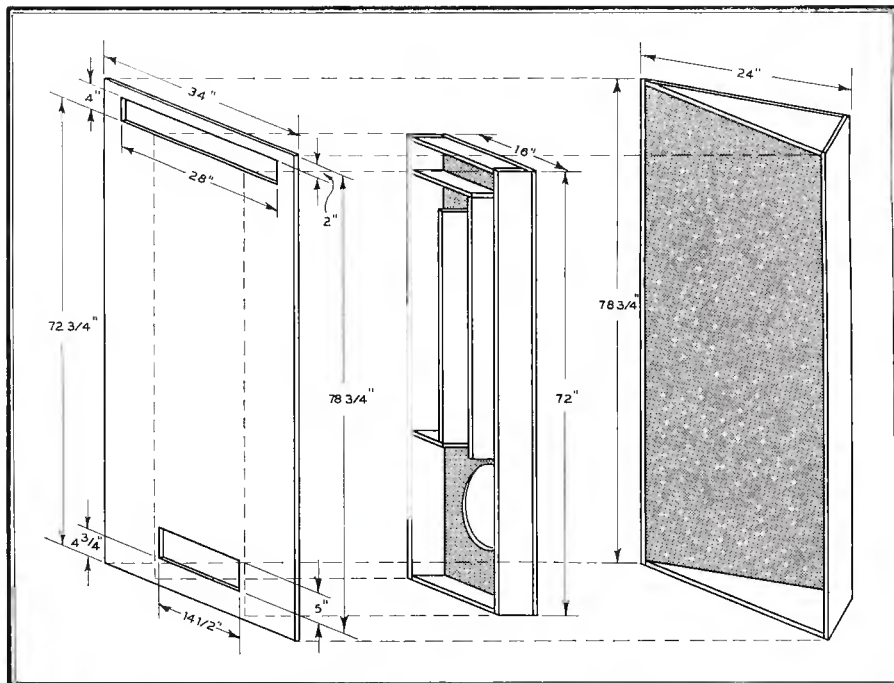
DIMENSIONS OF FRONT PANEL AND CORNER ENCLOSURE ASSEMBLY FOR 3/4-INCH PLYWOOD
